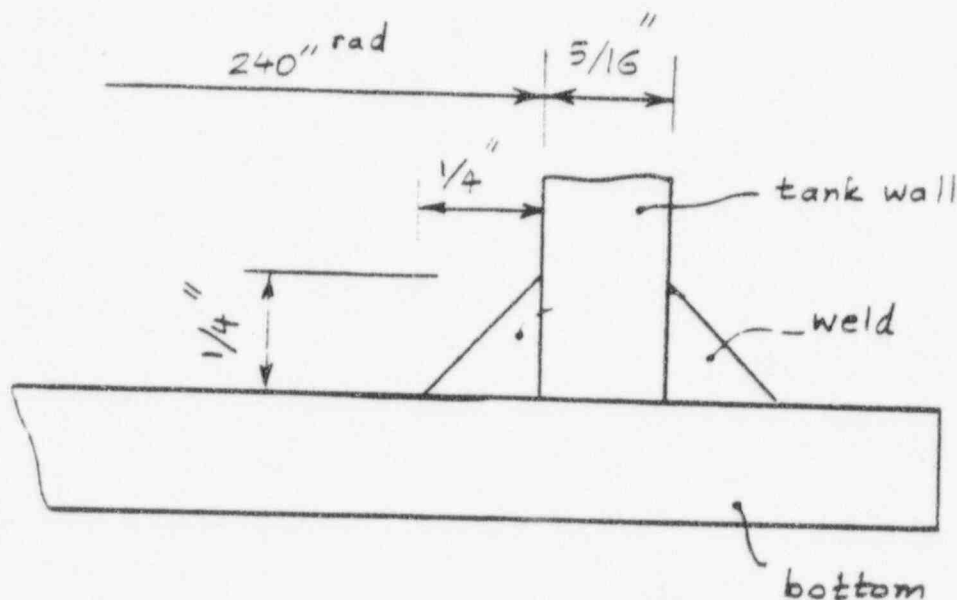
Tank Wall-to-Bottom Weld (Reference 24)
